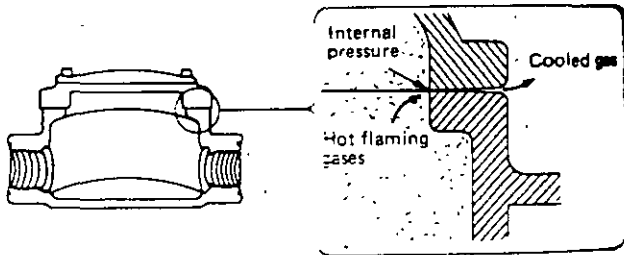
Hot gases are cooled as they pass across a machined-flanged joint. The clearance between the machined surfaces is kept very small.
